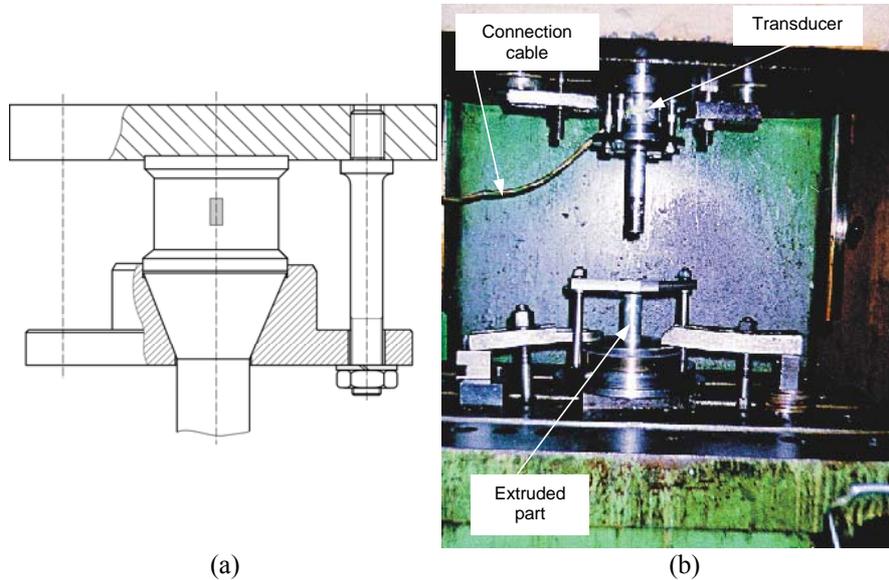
The detail of extrusion tool with transducer (a) and the tool in working position (b).
